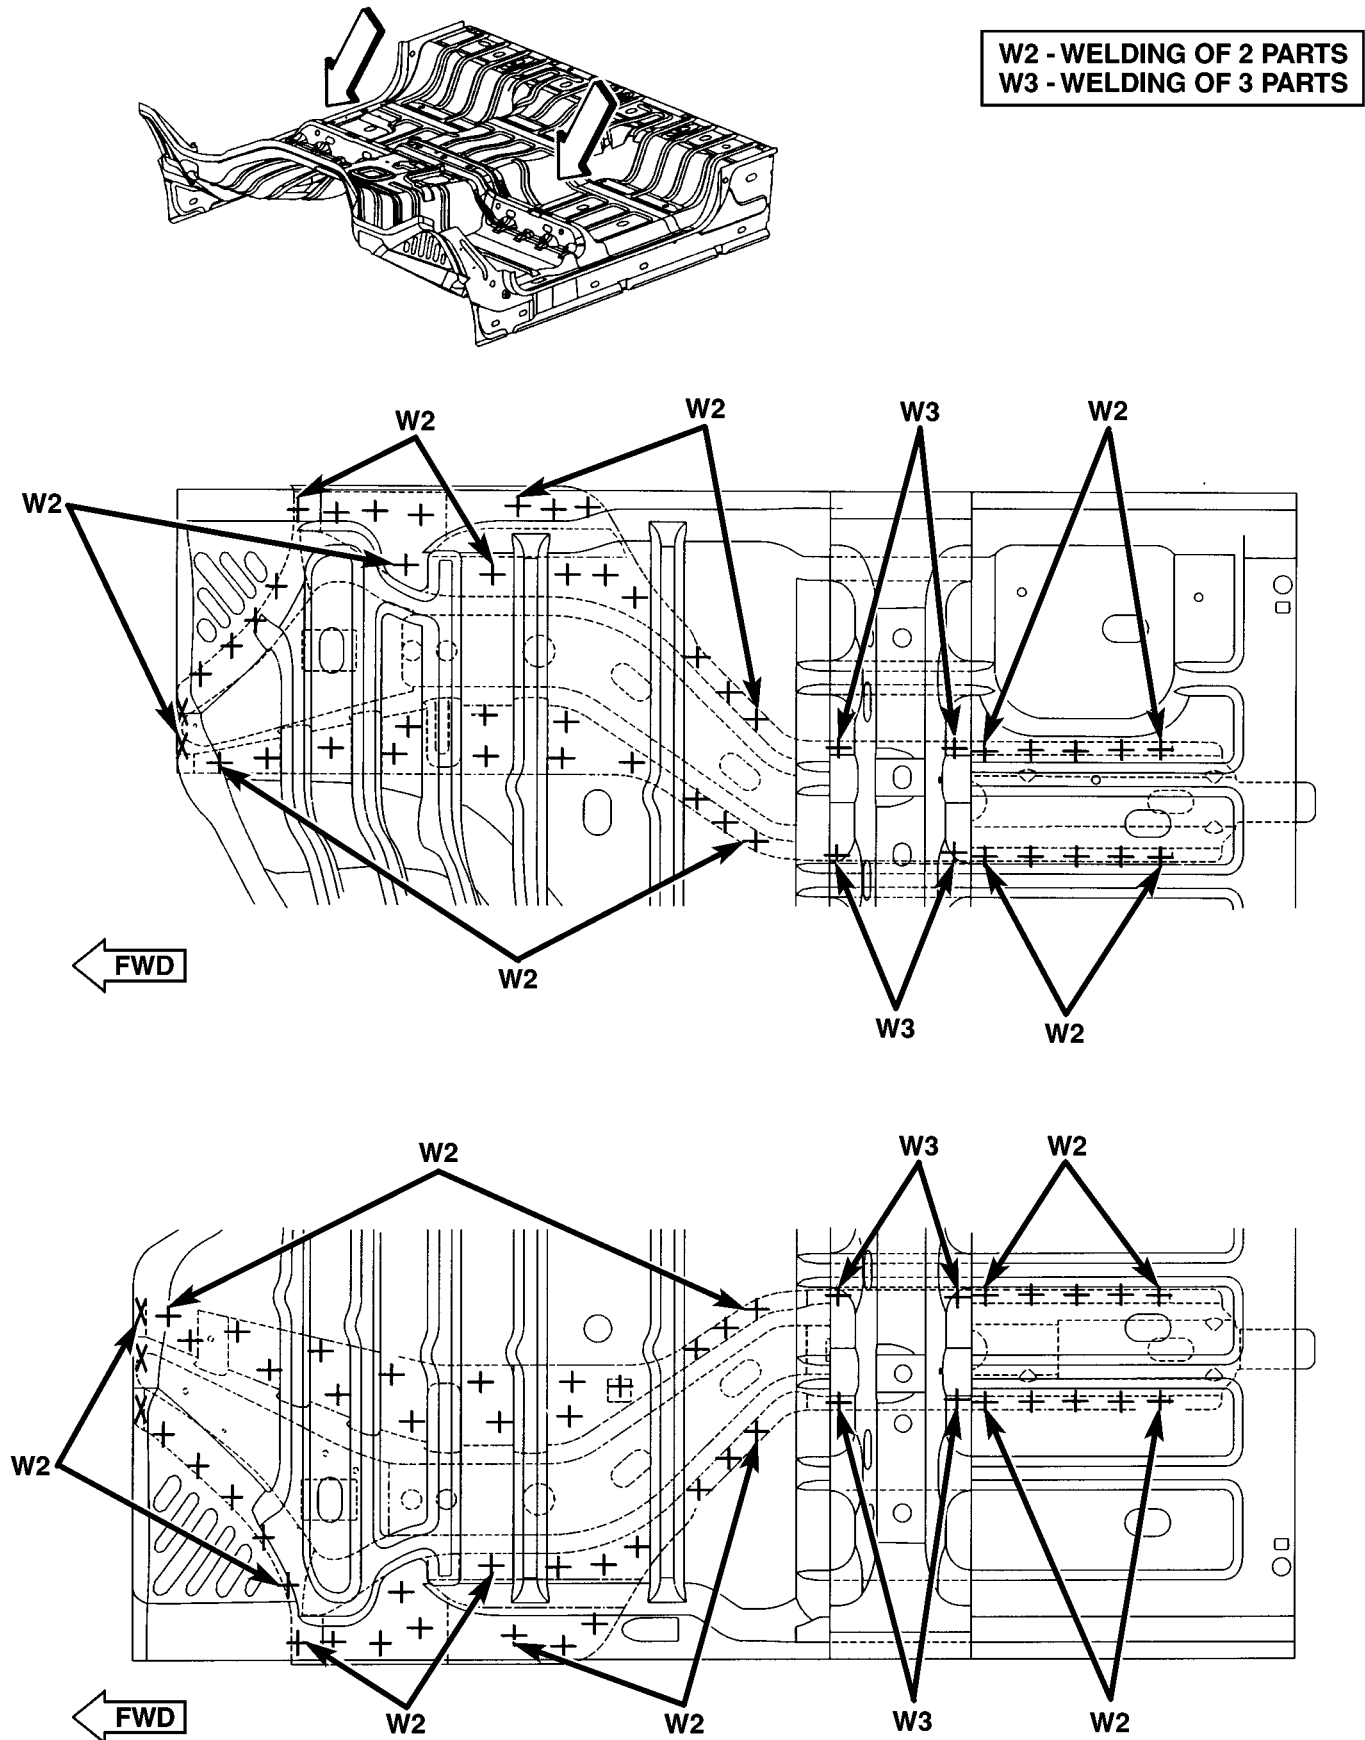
SEAT MOUNTING FRONT CROSSMEMBER - STANDARD CAB
